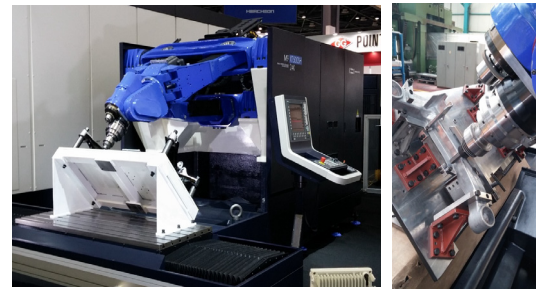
Example of 3-dimensional hybrid FSW machine with parallel kinematic structure (HWACHEON)
